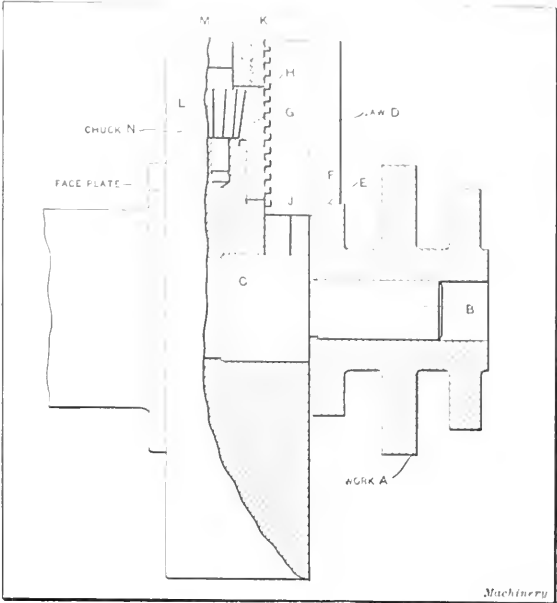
Holding Device employing a Three-jaw Chuck with a Floating Scroll
